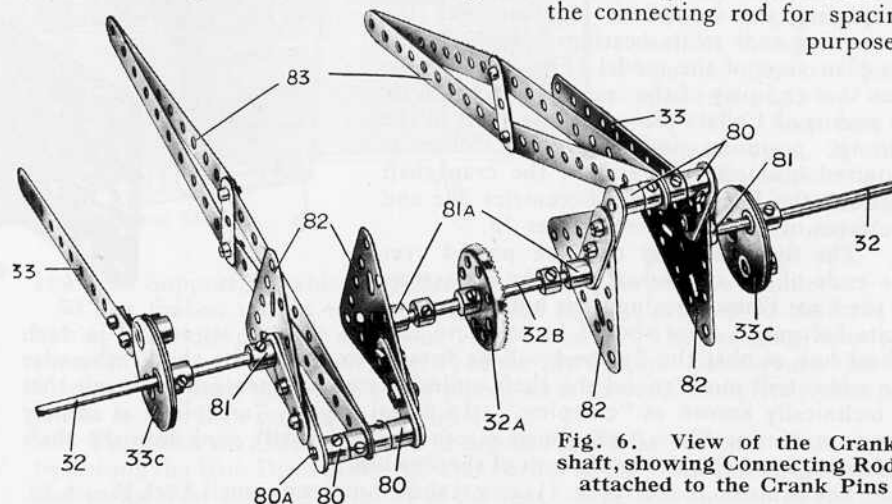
View of the Crankshaft, showing Connecting Rods attached to the Crank Pins
